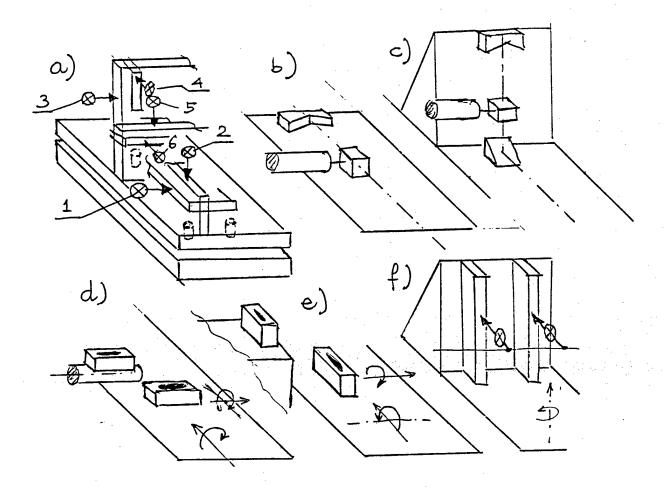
Measurement arrangements for complete test for horizontal boring machines and milling machines.
